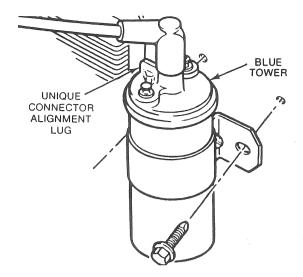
Duraspark I coil has an alignment lug. (Courtesy of Ford Motor Co.)
